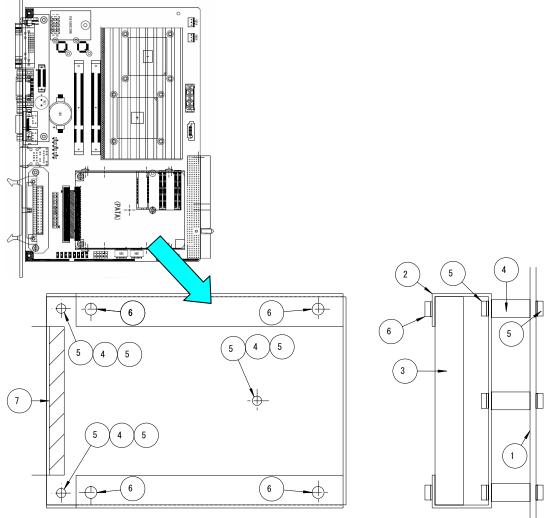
CPU Board Assembly, SSD
